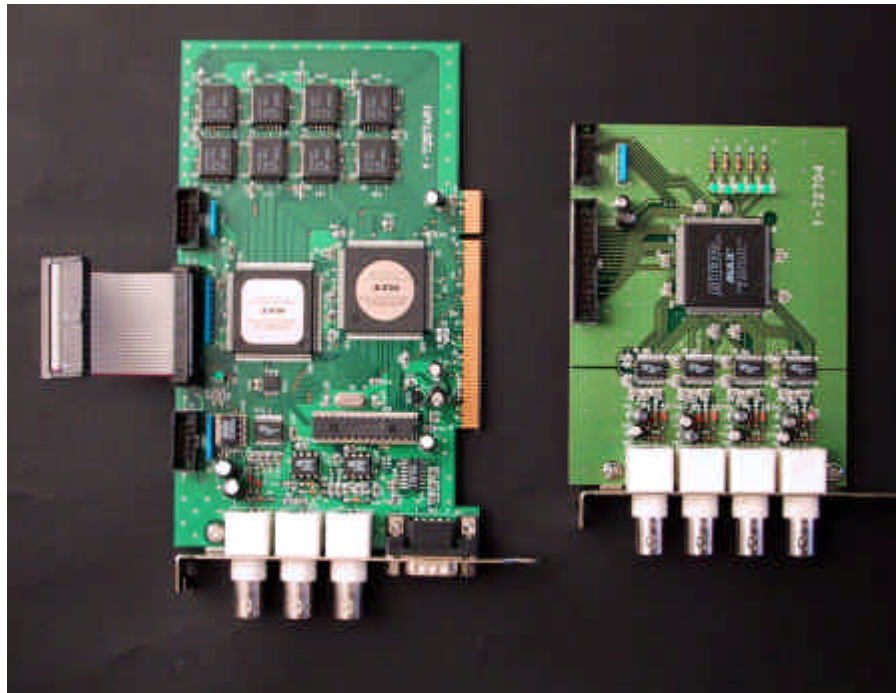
Picture of the main board (left) and the auxiliary board (right) of the IP-VLBI (VSSP) board. Two boards are connected by the cable attached to the main board in the picture.
